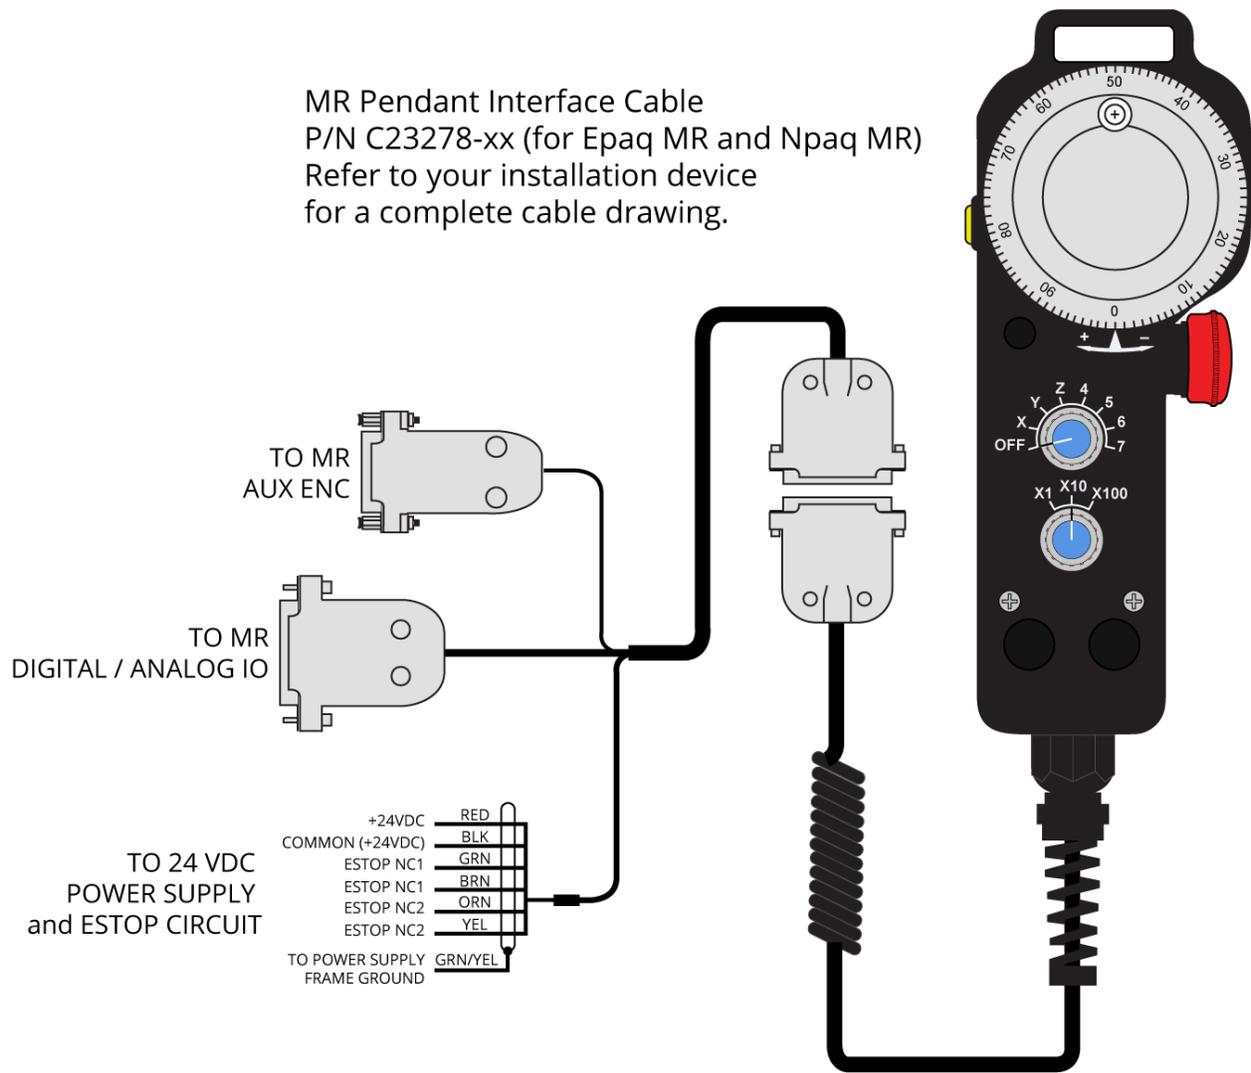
MPG to Epaq MR/Npaq MR Cable Drawing
